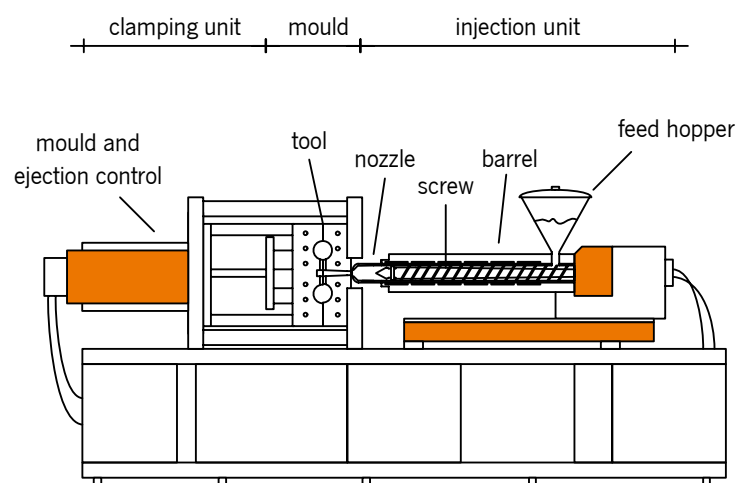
Schematic drawing of a typical horizontal injection moulding machine.
